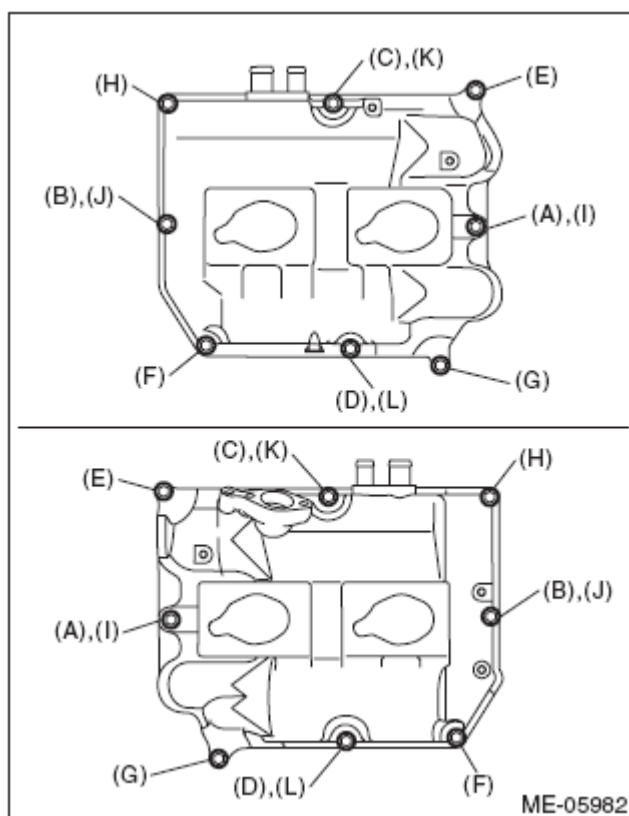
Identifying Tightening Sequence Of Rocker Cover Bolts
